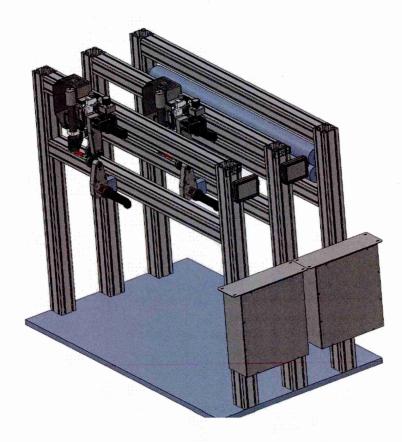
Cad Model Of Pfaff Double Hot Air Welding Machine
